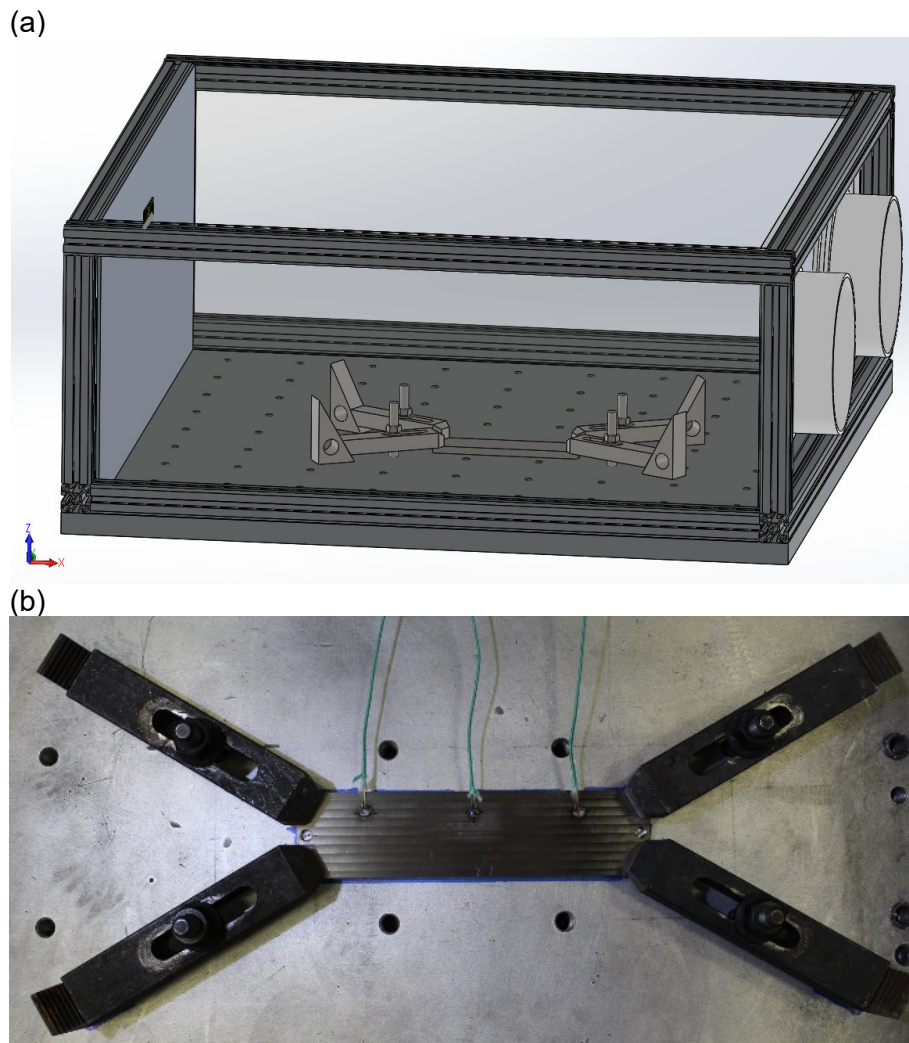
(a) Model of the welding chamber; (b) Experimental set-up inside the welding chamber
